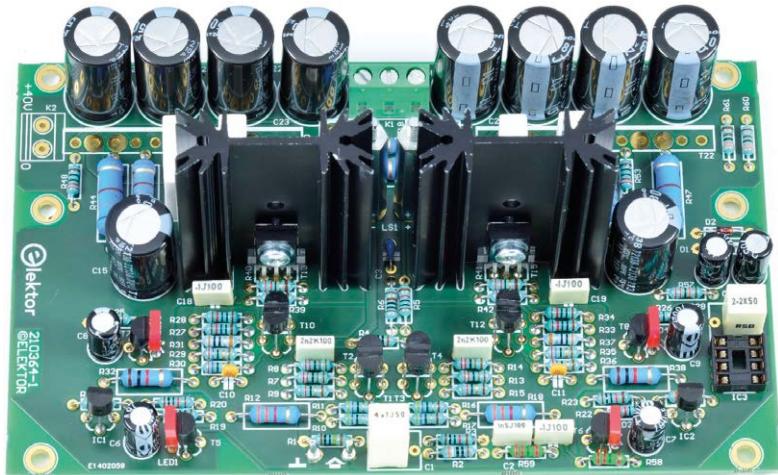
The two small heatsinks and transistors T13...T16 soldered in place.
